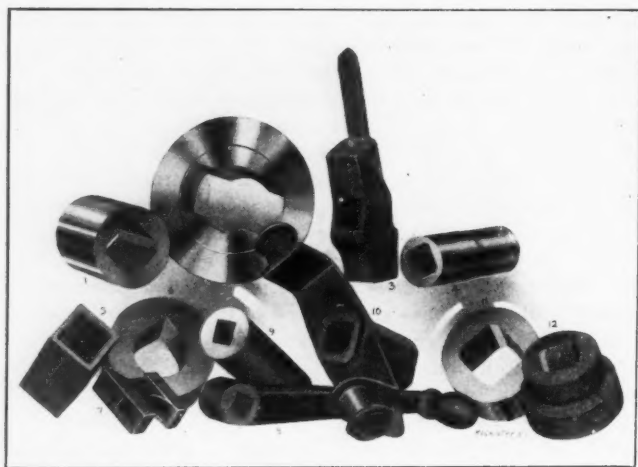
Work Performed by the La Pointe Broaching Machine.
